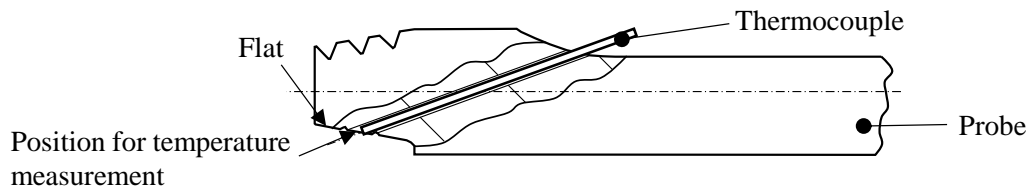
Position of the thermocouple to measure the welding temperature for temperature control.
